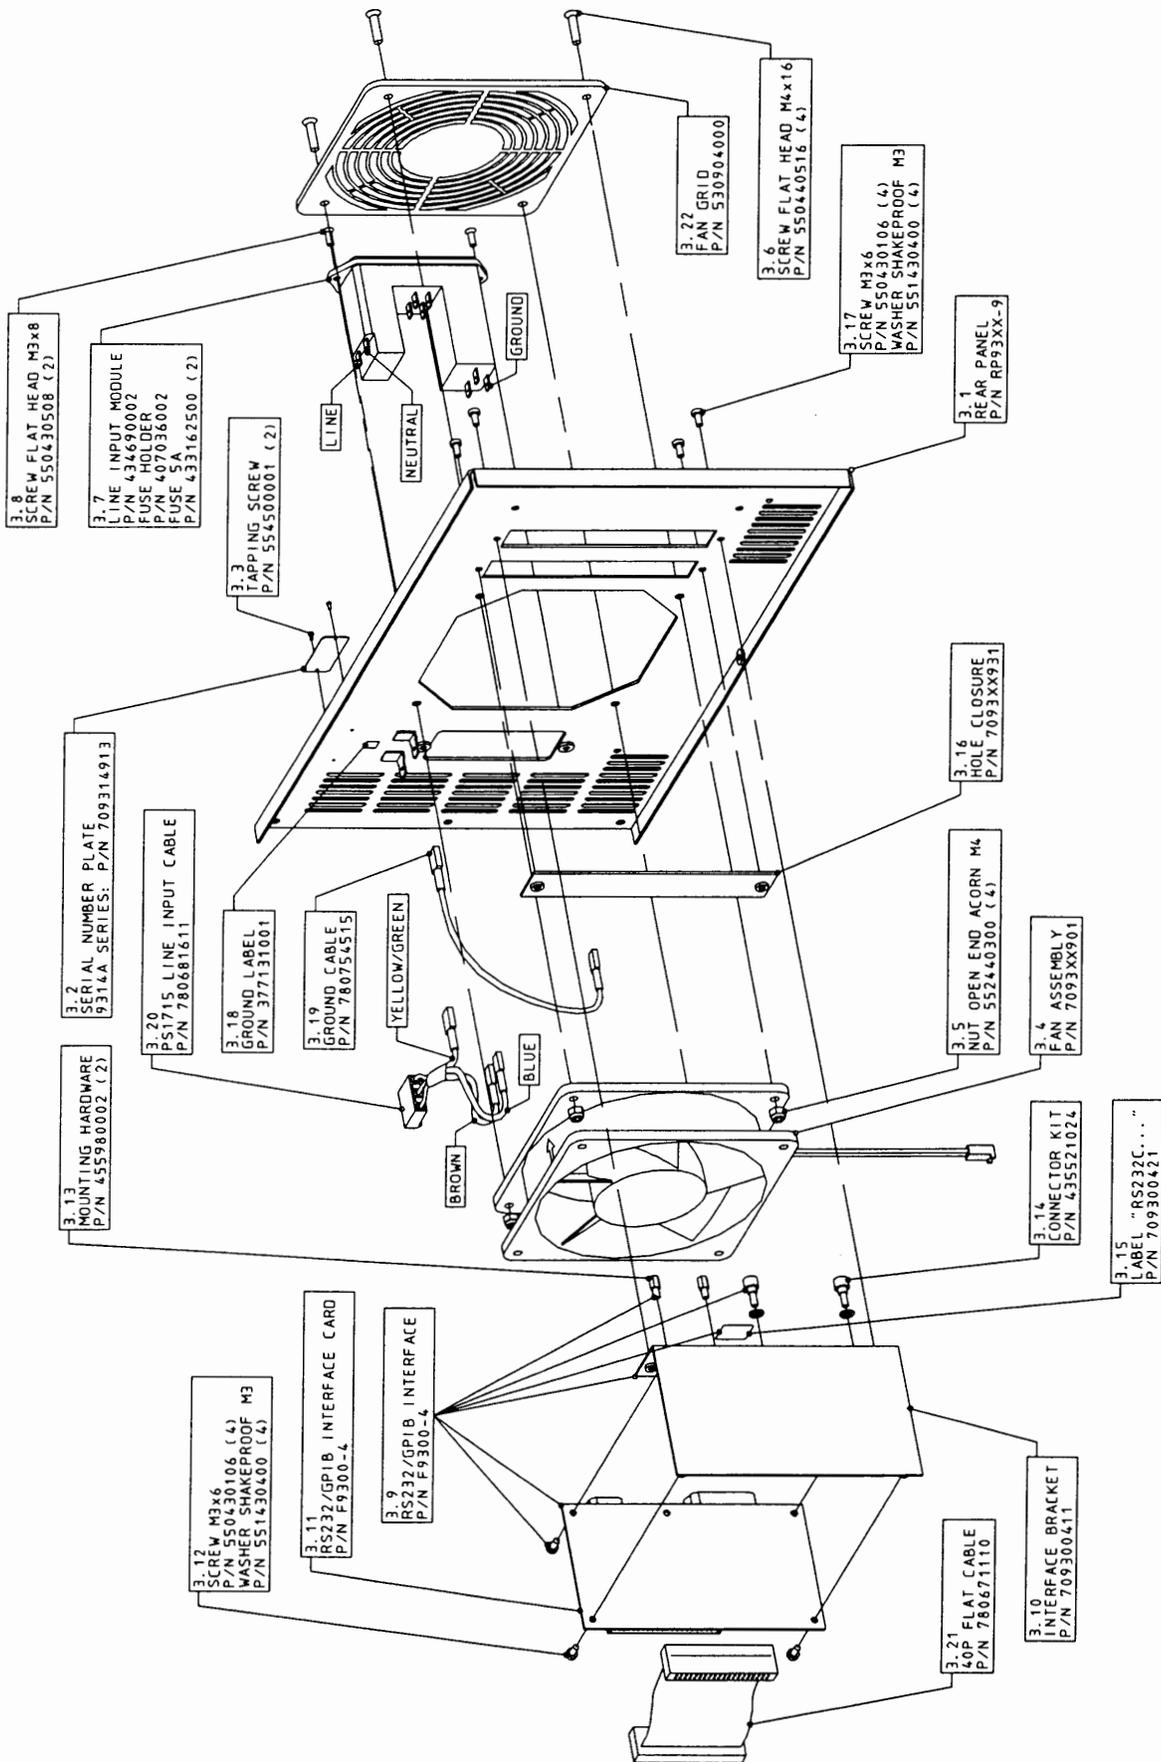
9314A/M/L Rear Panel Assembly (ECO1000)
